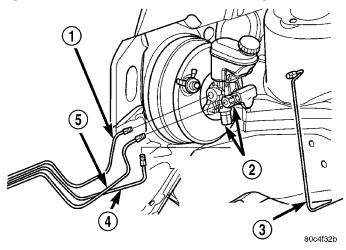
Brake Tubes At Master Cylinder - W/O ABS
